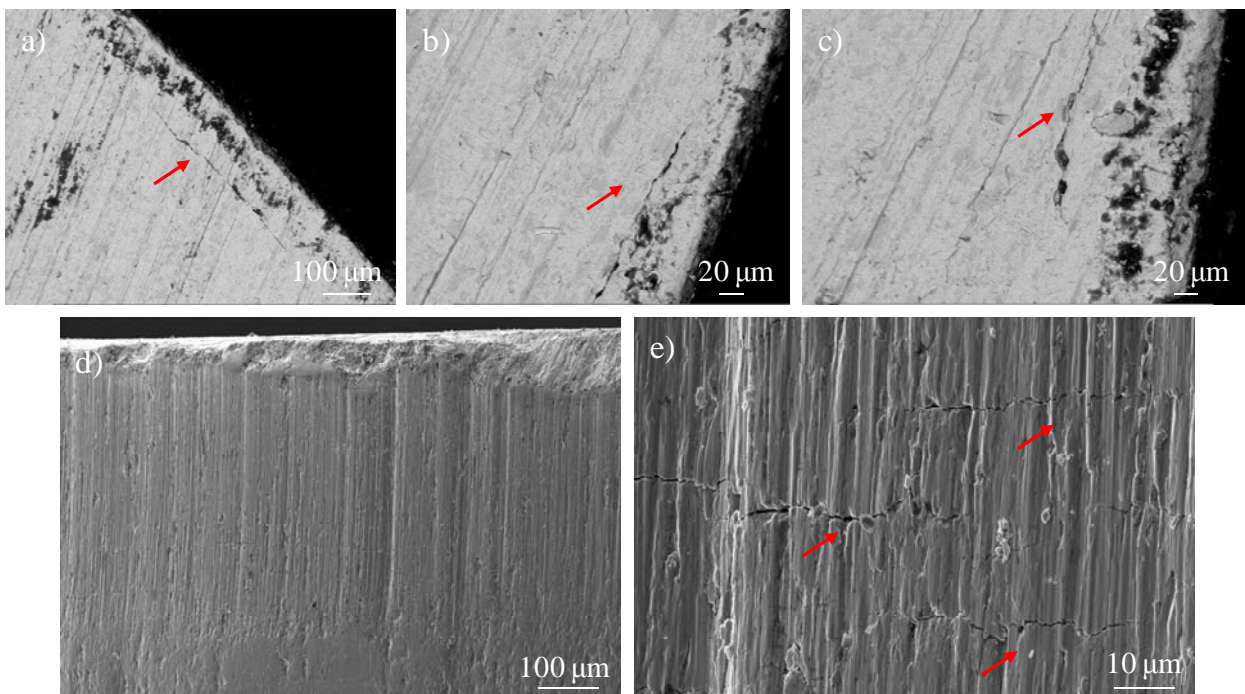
Fractography of 1.2379B punch: a), b) and c) cracks at the rake face after 2600 strokes; d) and e) wear, deformation and cracks at the flank face after 31000 strokes
